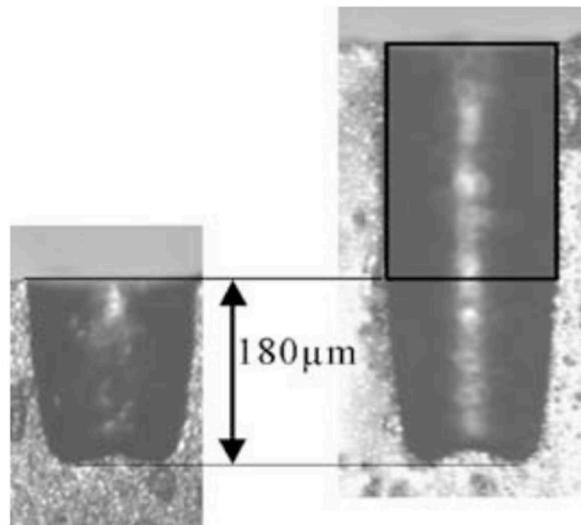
Constant tool shape into the workpiece after a 180  $\mu$  m erosion depth [28].
